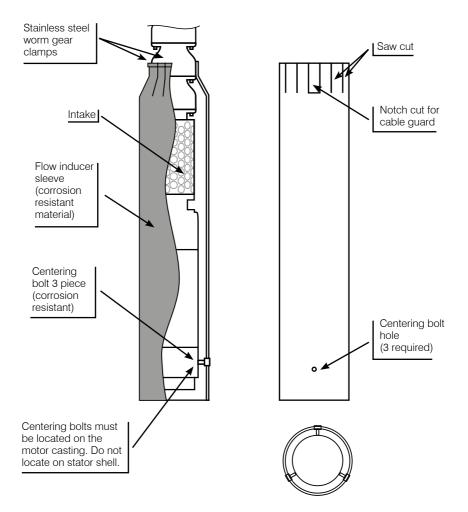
shows a typical flow inducer sleeve construction. Sleeve is fixed to the body of the pump with the stainless steel worm gear clamps. Sleeve is centered with 3 bolts from the bottom casting part of the motor's body. When the material of the sleeve is selected , a corrosion resistant material (i.e. PVC) should be used.
